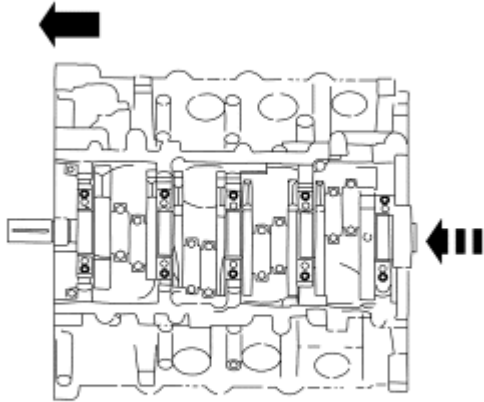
Installing Rear Crankshaft Upper Thrust Washer
